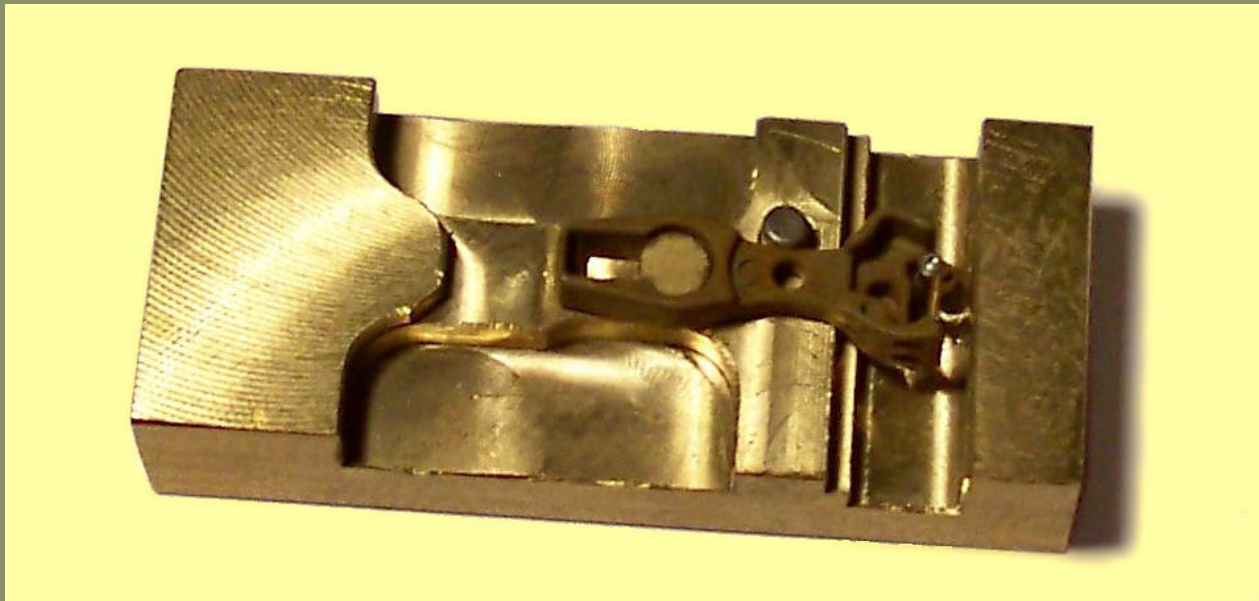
(Step 1): EN87K top in the AFN coupler assembly jig.
